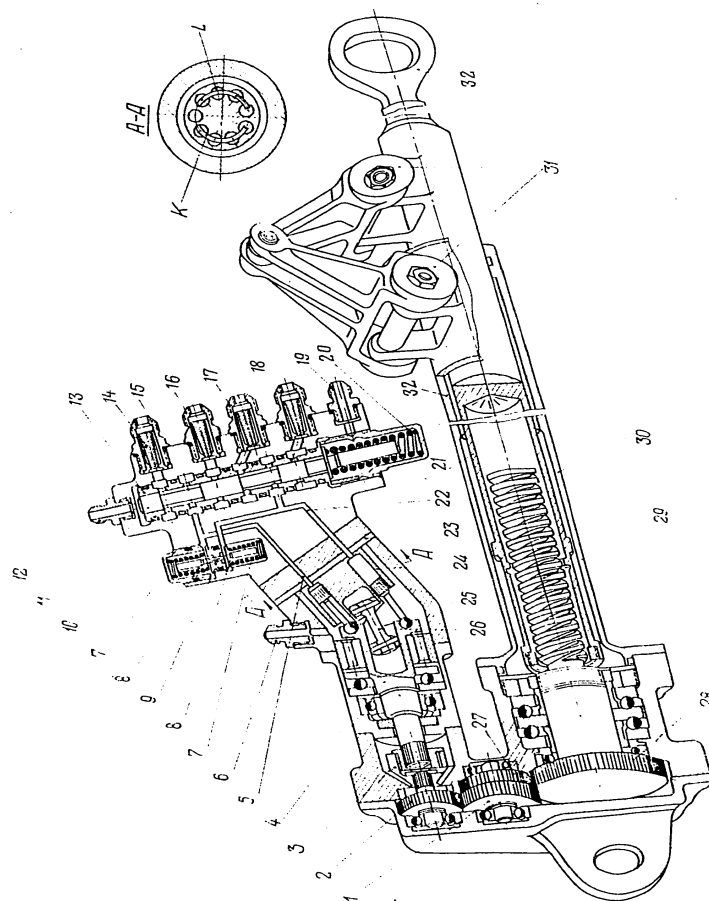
HYDRAULIC WING CONTROL MECHANISM ГМК-1
